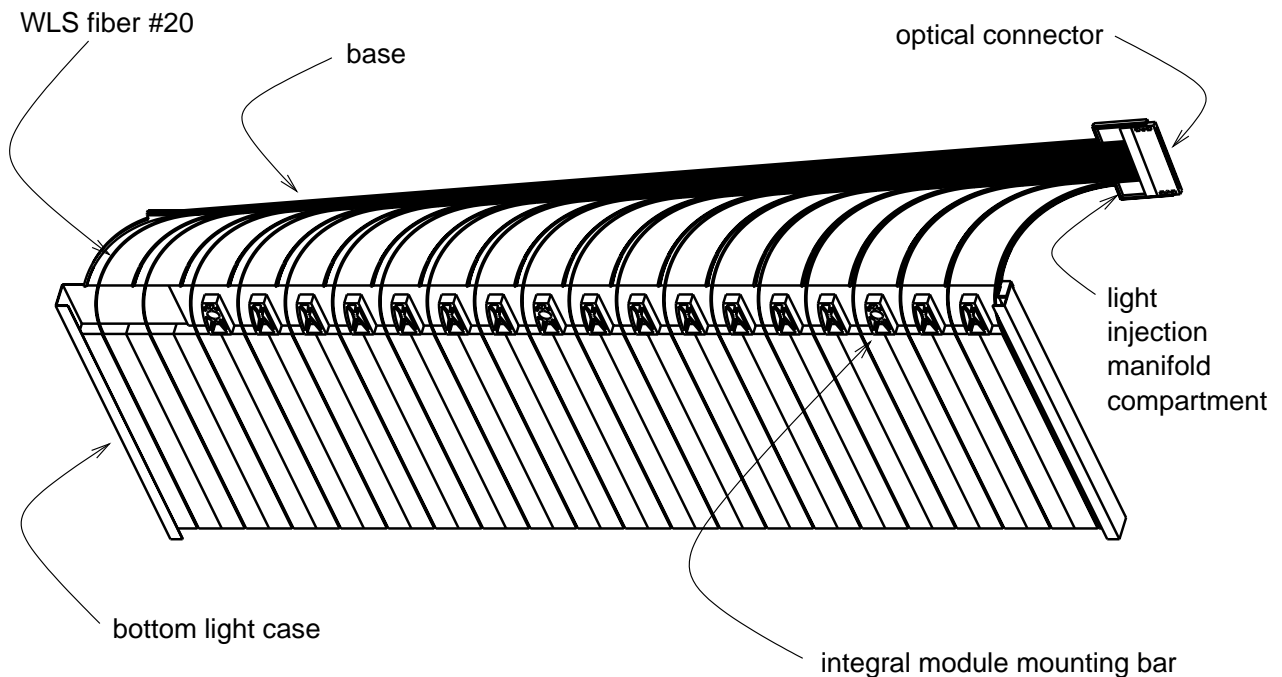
Sketch of one end of a partially assembled 20-wide, perpendicular-ended scintillator module, showing the fiber routing and the module mounting bar.
